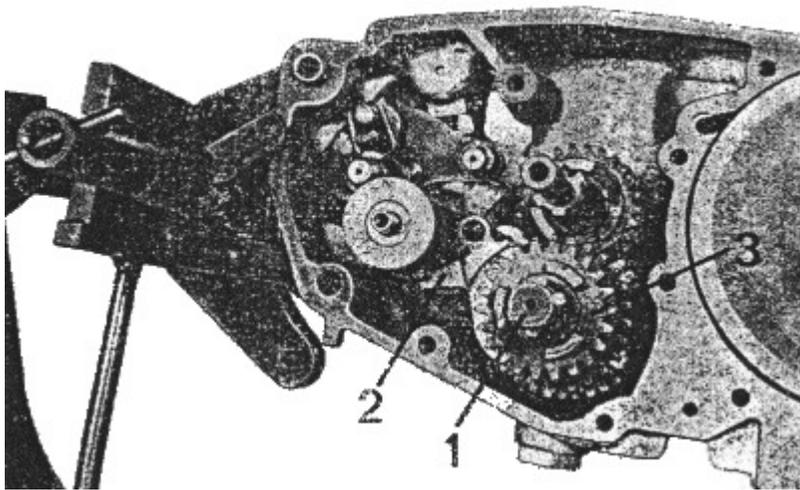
Mounting the gear-shift wheel of the 3rd speed
